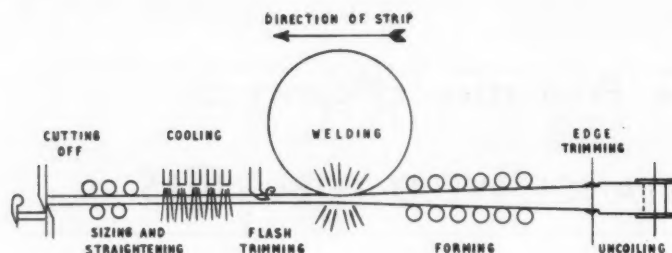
Diagrammatic representation of tube making process by electric weld tube mill.
